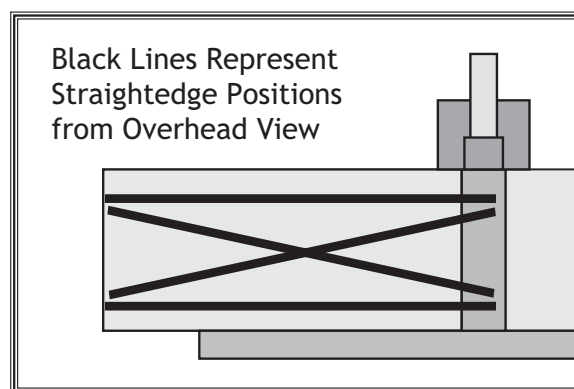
Straightedge positions for verifying if outfeed table is parallel with cutterhead.
